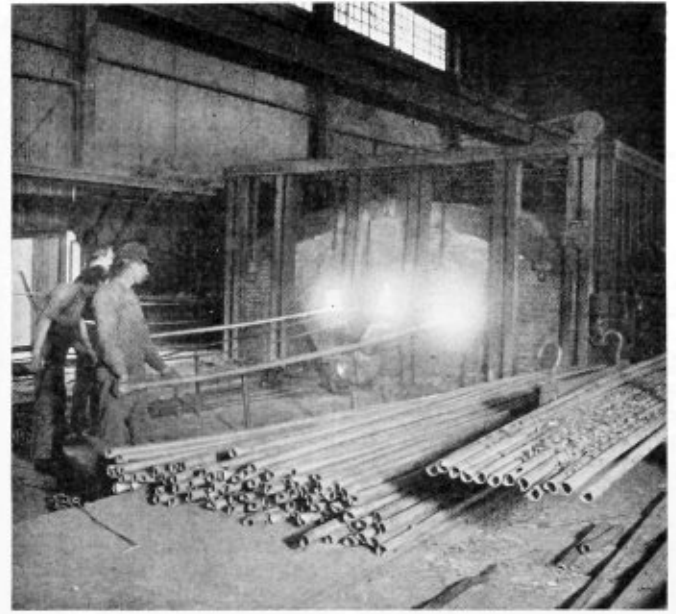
Welding Furnace Where the Bent Skelp Is Given the Welding Heat
